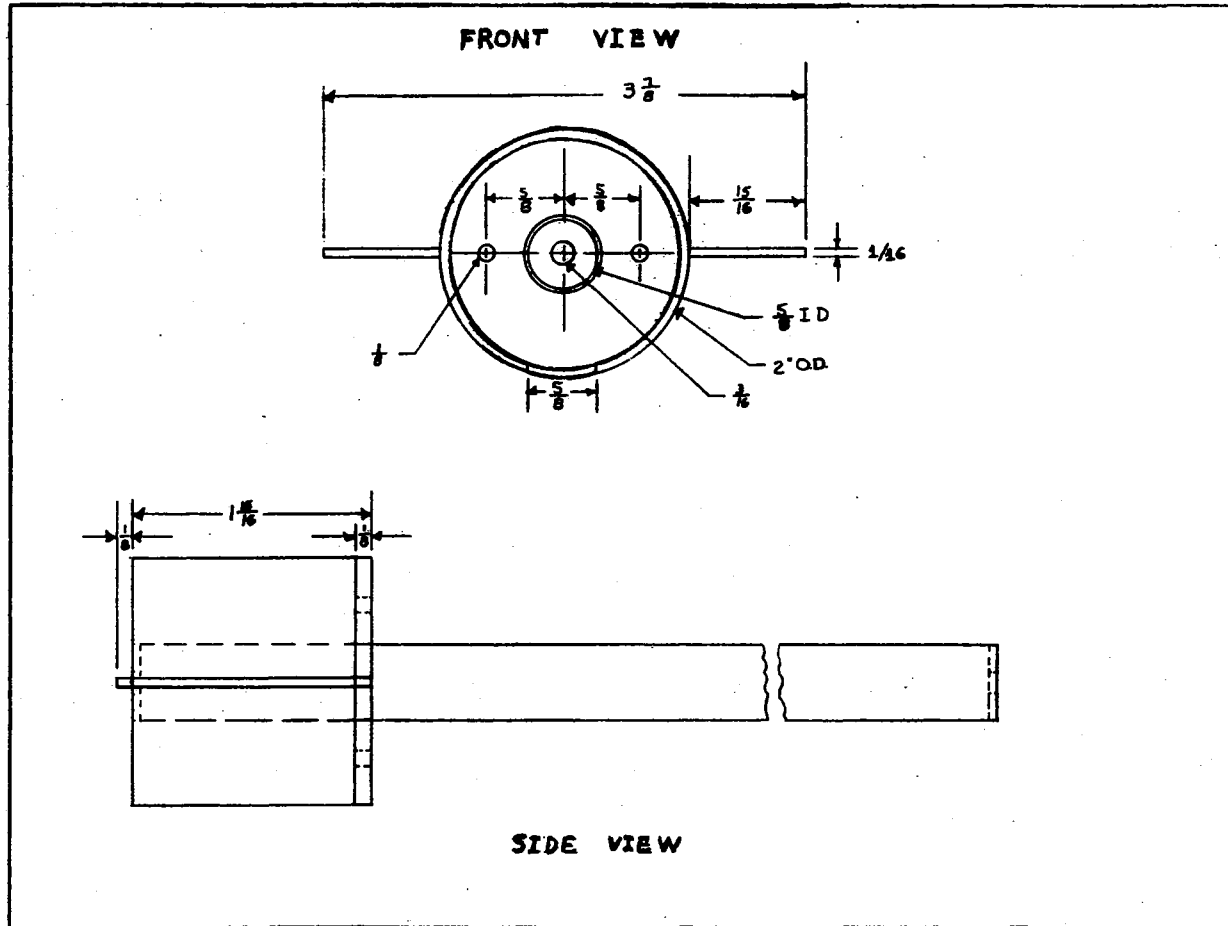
Detailed Dimensioned Drawing of the Front and Side View of the Fusible Rod Containing Tube, and Disk and Material Catch Tank Connecting Mechanism
